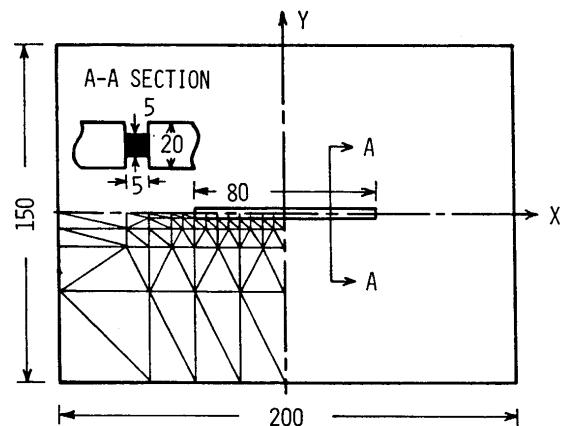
y-type weld cracking specimen and its mesh division for analysis.
